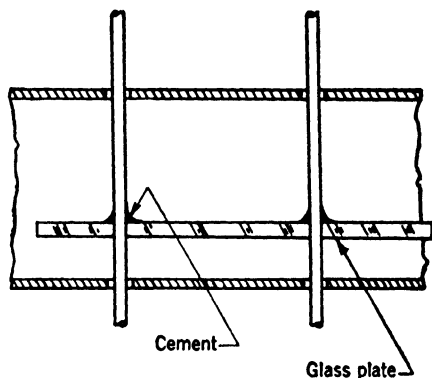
Cement mounting of glass plate in waveguide.
